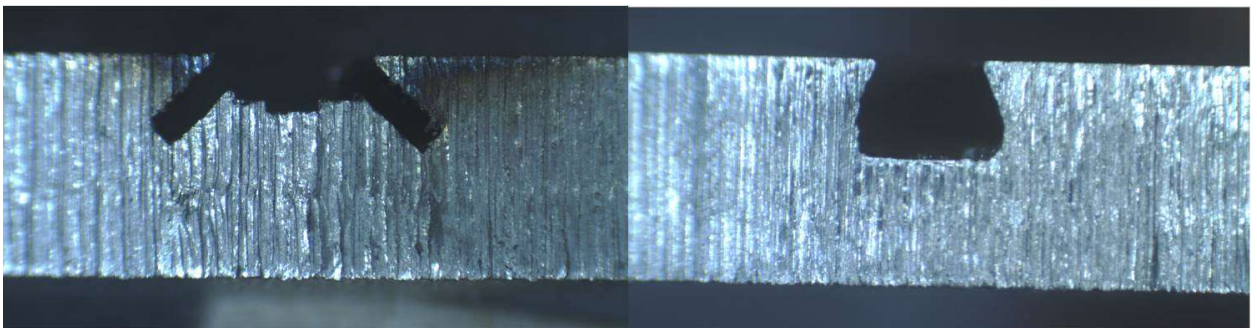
Groove patterns cut into base steel layer: slit saw and endmills(left), O-ring dovetail(right)
